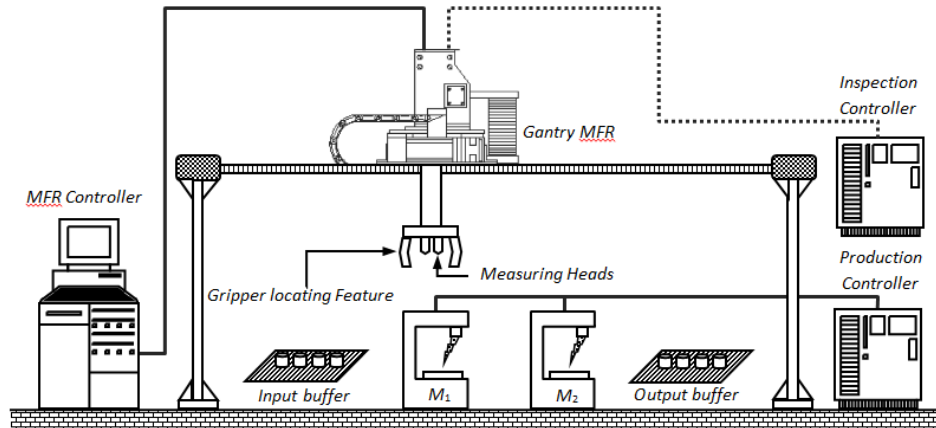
A MFRC with production machines  $M_1, M_2$  and in-line inspection system.
